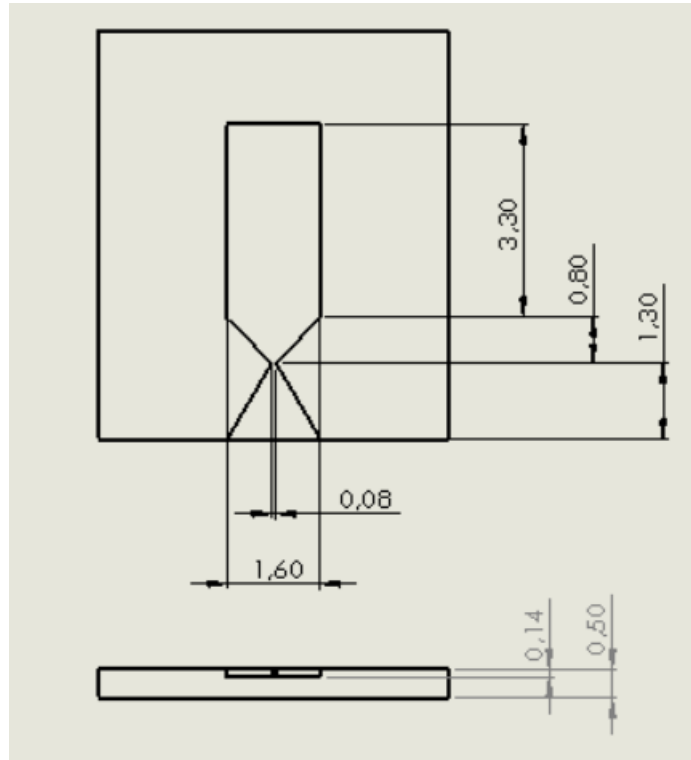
Technical design with dimension in *mm* of the wafer containing half chamber and half nozzle
